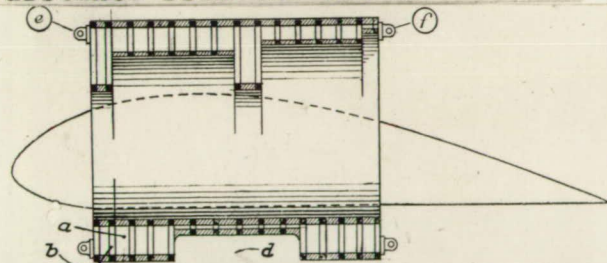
Cut through center of wing and fuselage. a, large element; b, small element; c, recess for fuel tank; d, recess for radiator & small fuel tank; e, attachment for engine block; f, attachment for rear part of fuselage
